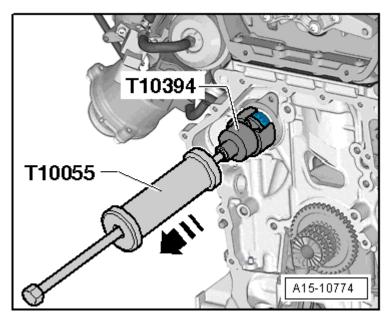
Identifying Installation And Operation Of Puller - T10055-Courtesy of VOLKSWAGEN UNITED STATES, INC.
